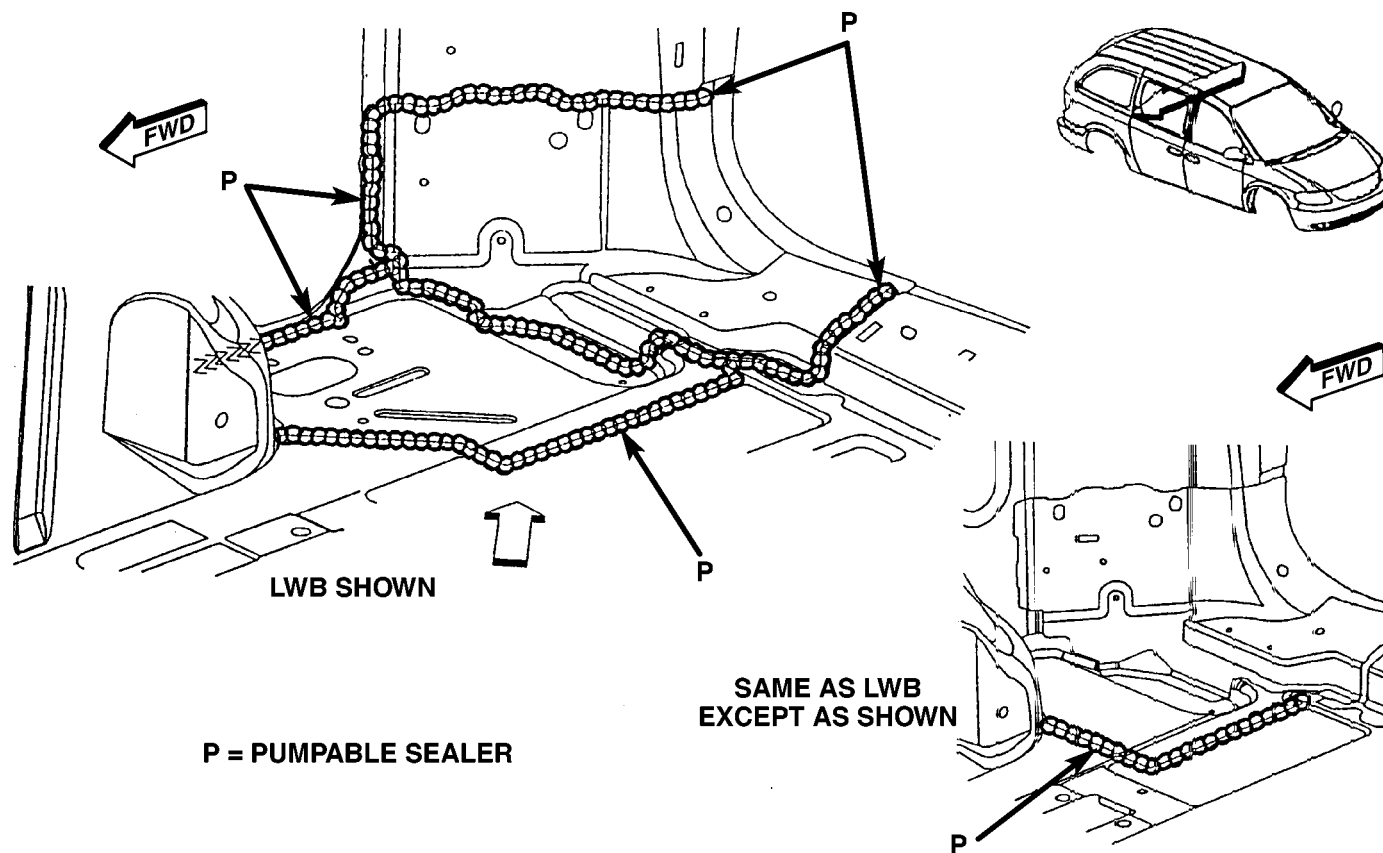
FLOOR PAN SILL & D-PILLAR SEAMS - LEFT AND RIGHT SIDES
